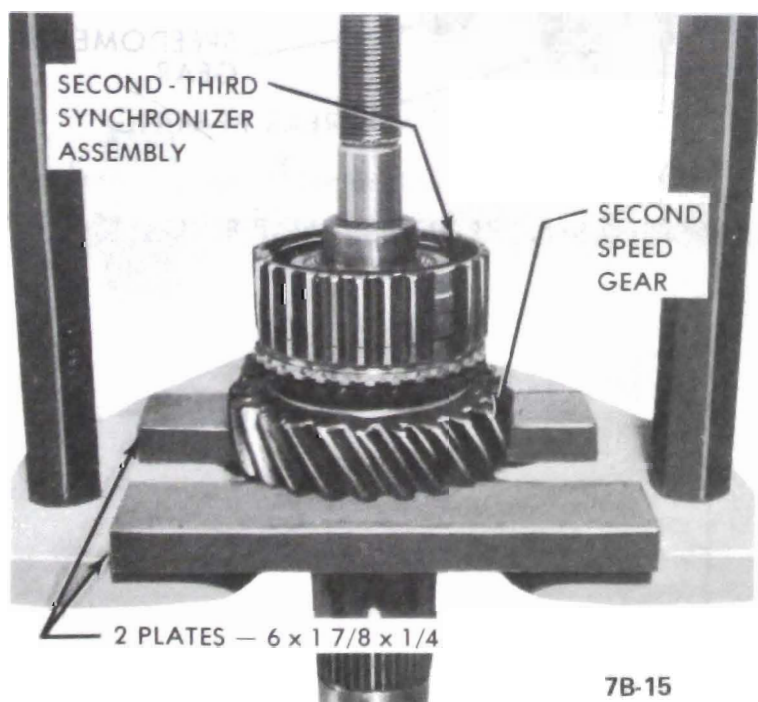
B-15 - Removing Second-Third Speed Synchronizer Assembly
